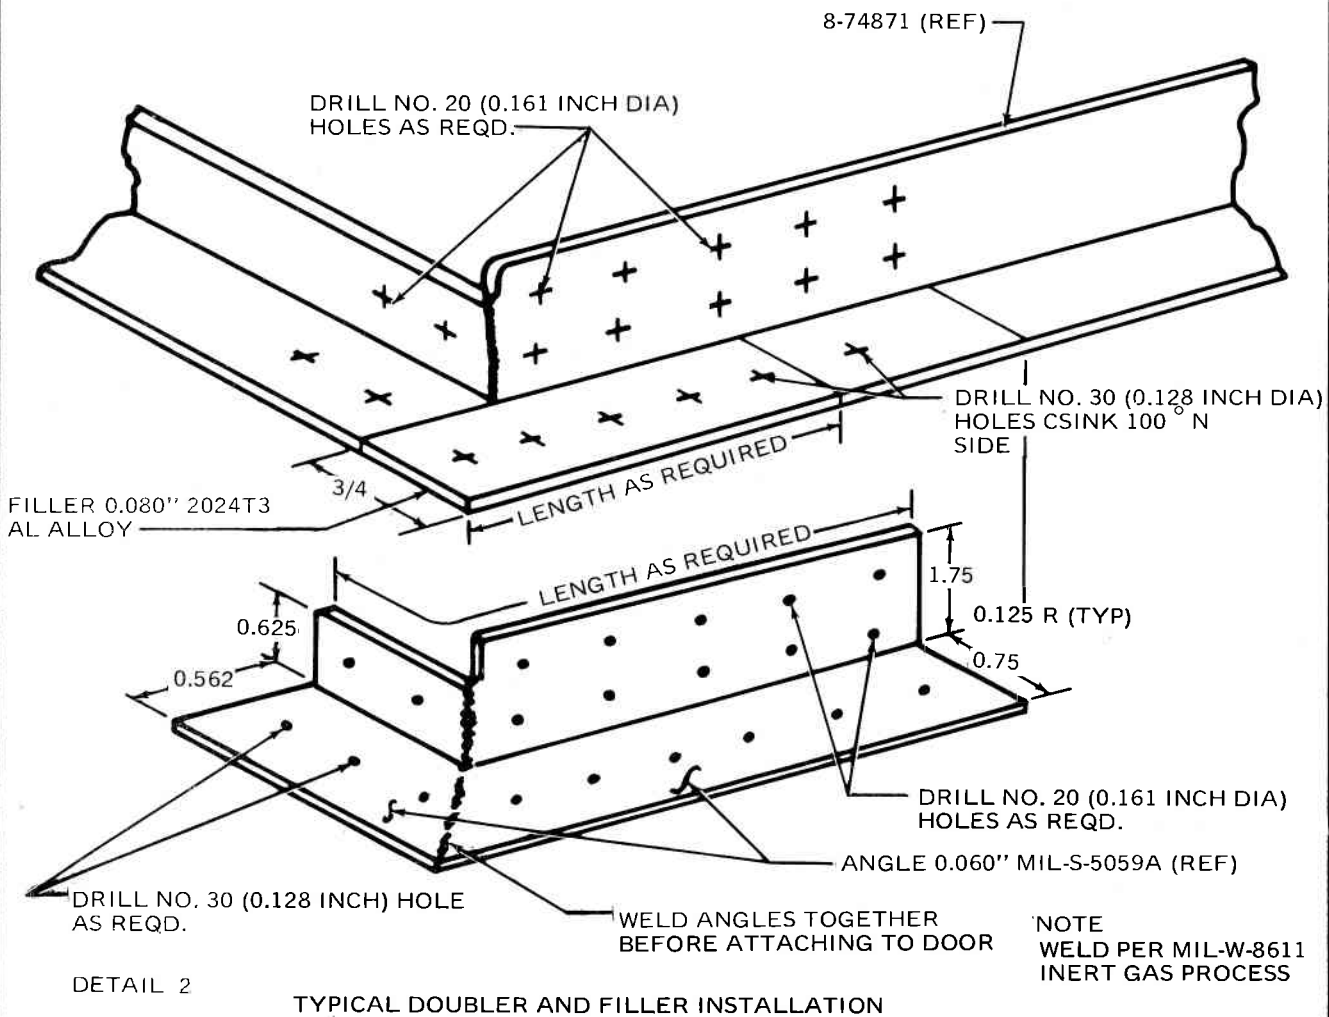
D. Speed Brake Door Flange Repair (Sheet 1 of 2)
